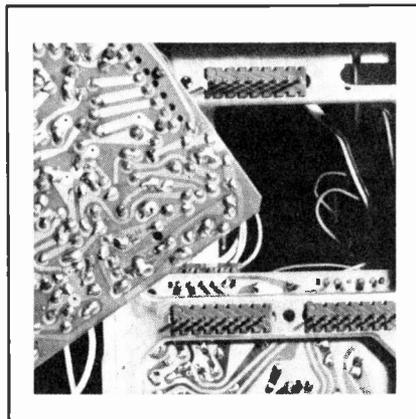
Module connections are made through a pin and socket arrangement and the master board is eliminated.
